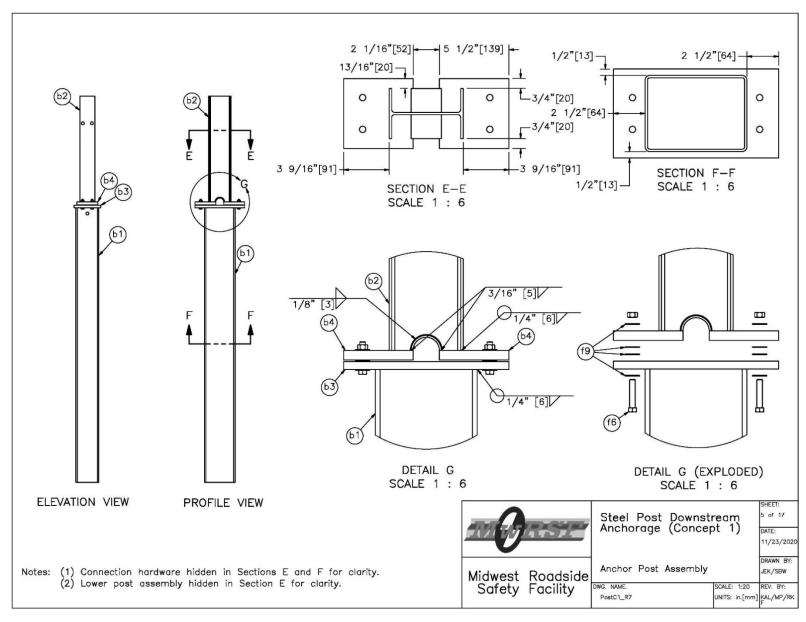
Anchor Post Assembly, Test No. SPDA-1
